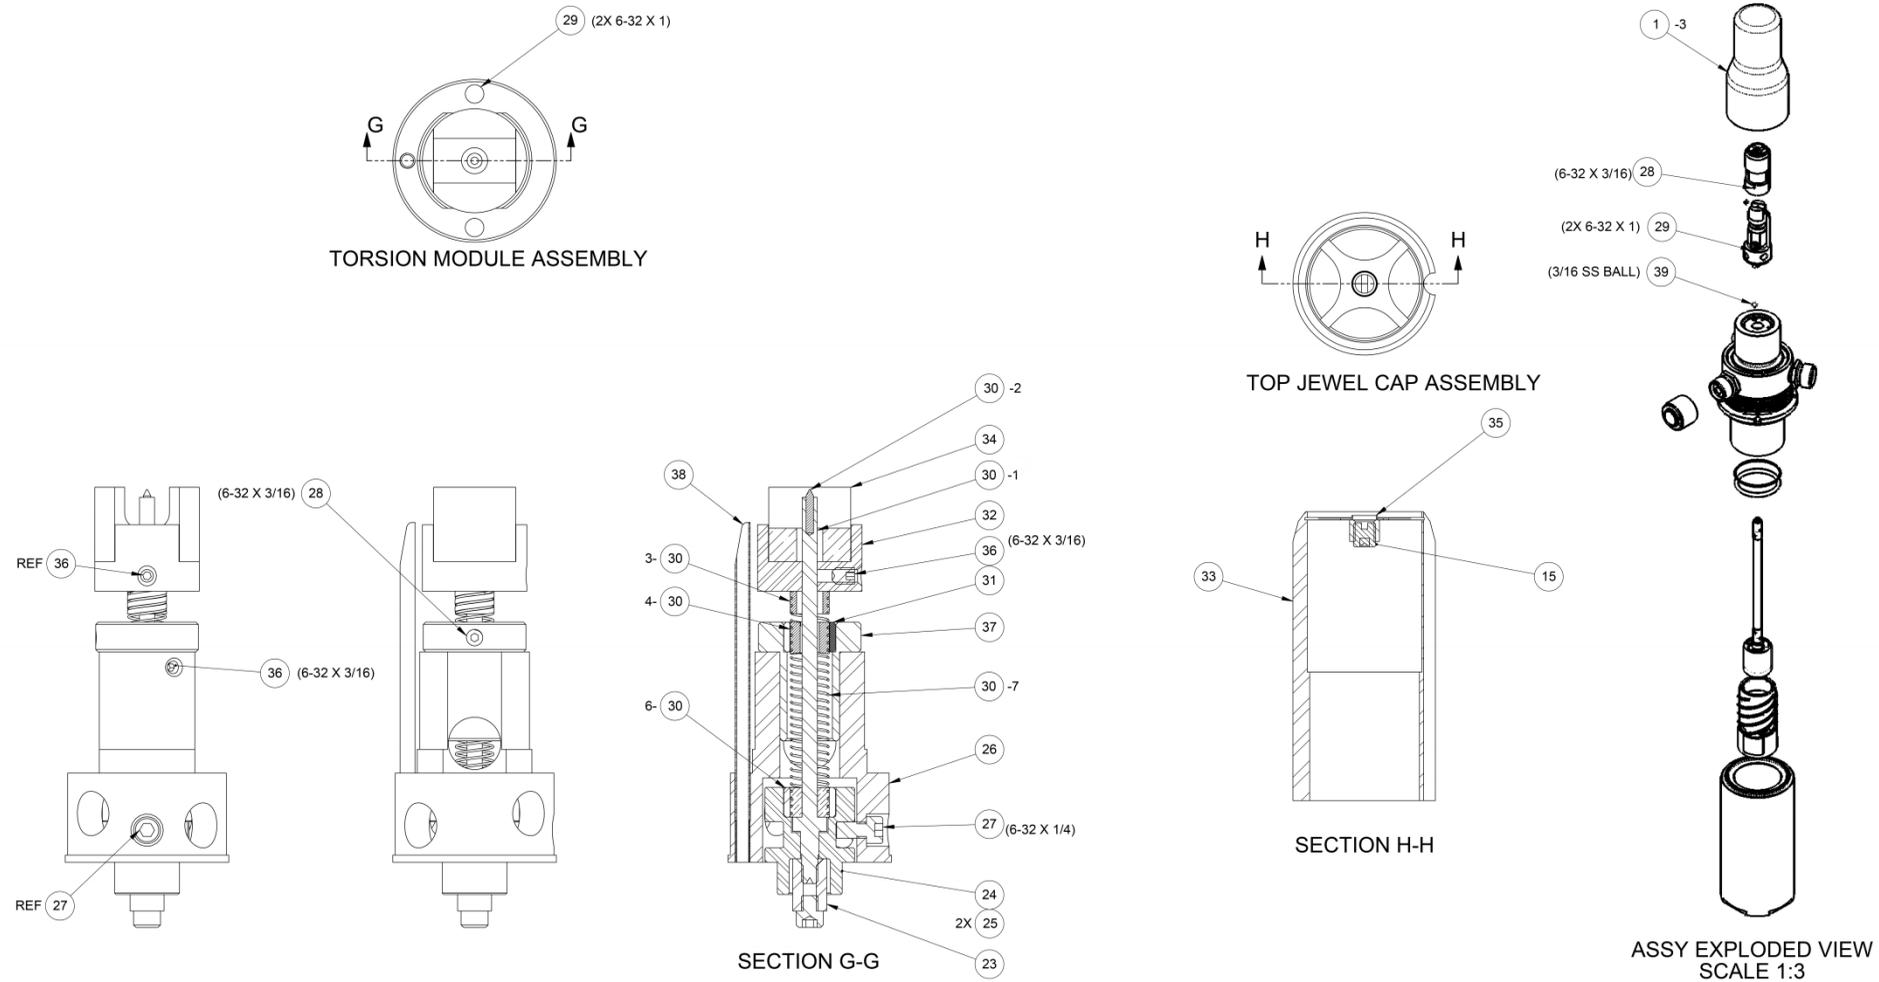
iX77 Torsion Module and Top Jewel Assemblies
